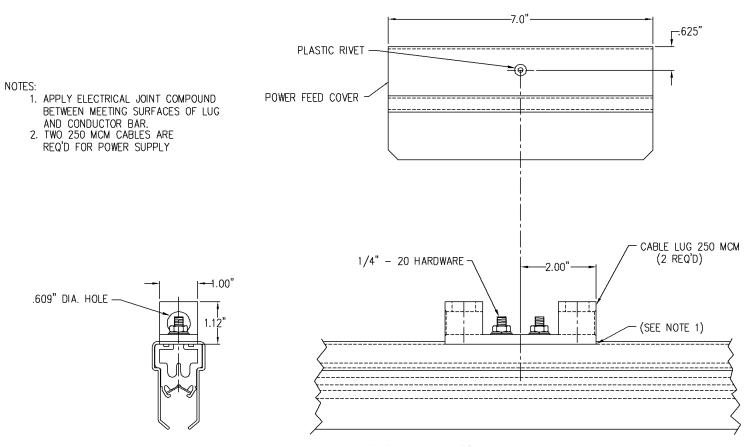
Power Feed Kit Assembly with cover for 700 Amp Conductor
